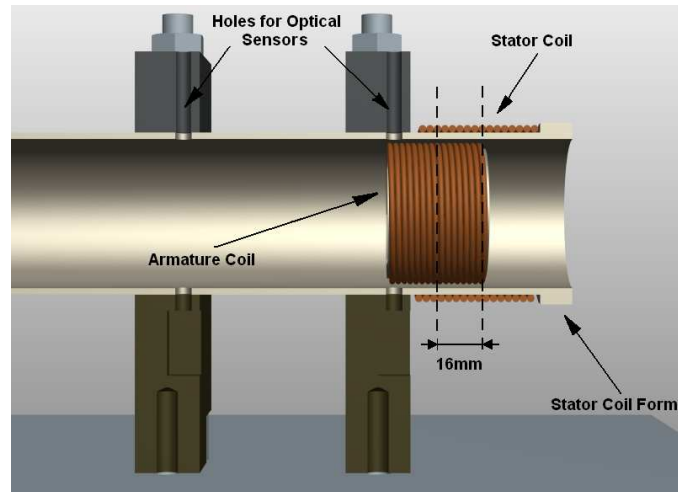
Section through stator coil, barrel and mounting clamps. This figure effectively demonstrates the optimum axial separation of the two coils and how the holes must be made in the mounting blocks to accommodate the optical sensors.
